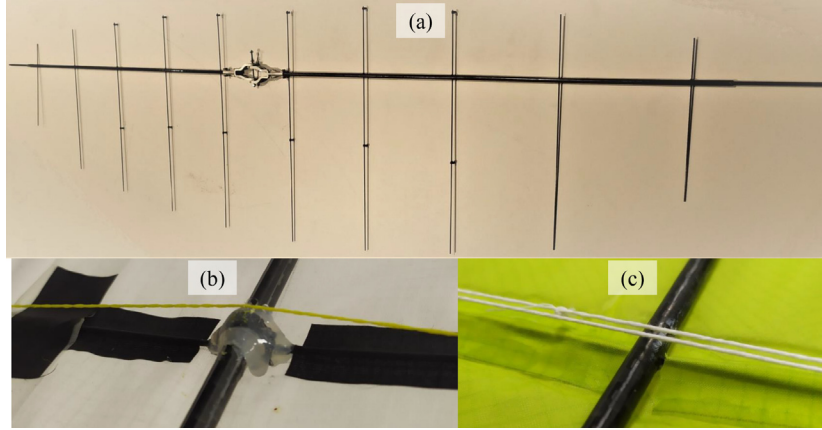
(a): The wing structure of the robot, main tube, and the ribs, 1.6 (m) wingspan; (b): the old version using 3D printed part and glue; (c): the new version passing the ribs through the tube without using glue.
